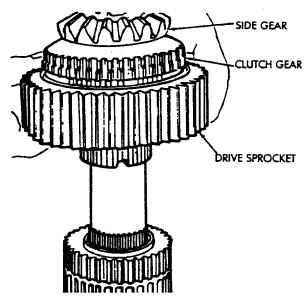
Remove Side Gear, Clutch Gear and Drive Sprocket
